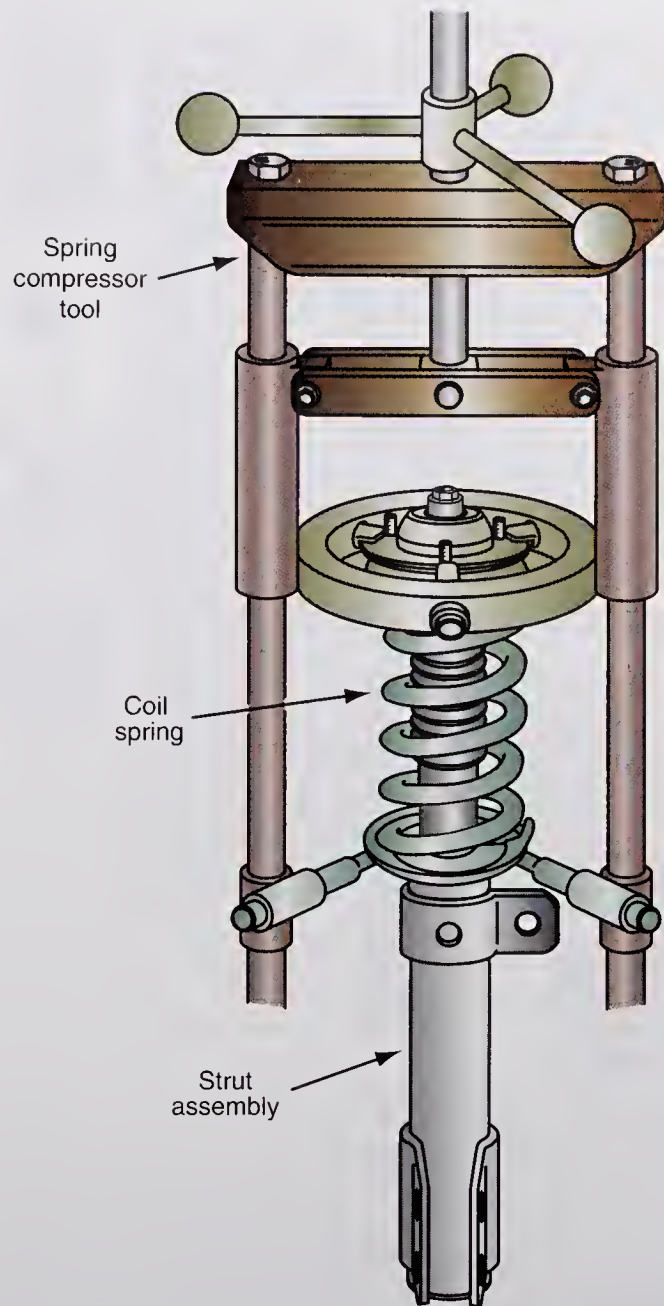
Coil spring and strut assembly mounted in a spring compressing tool.
